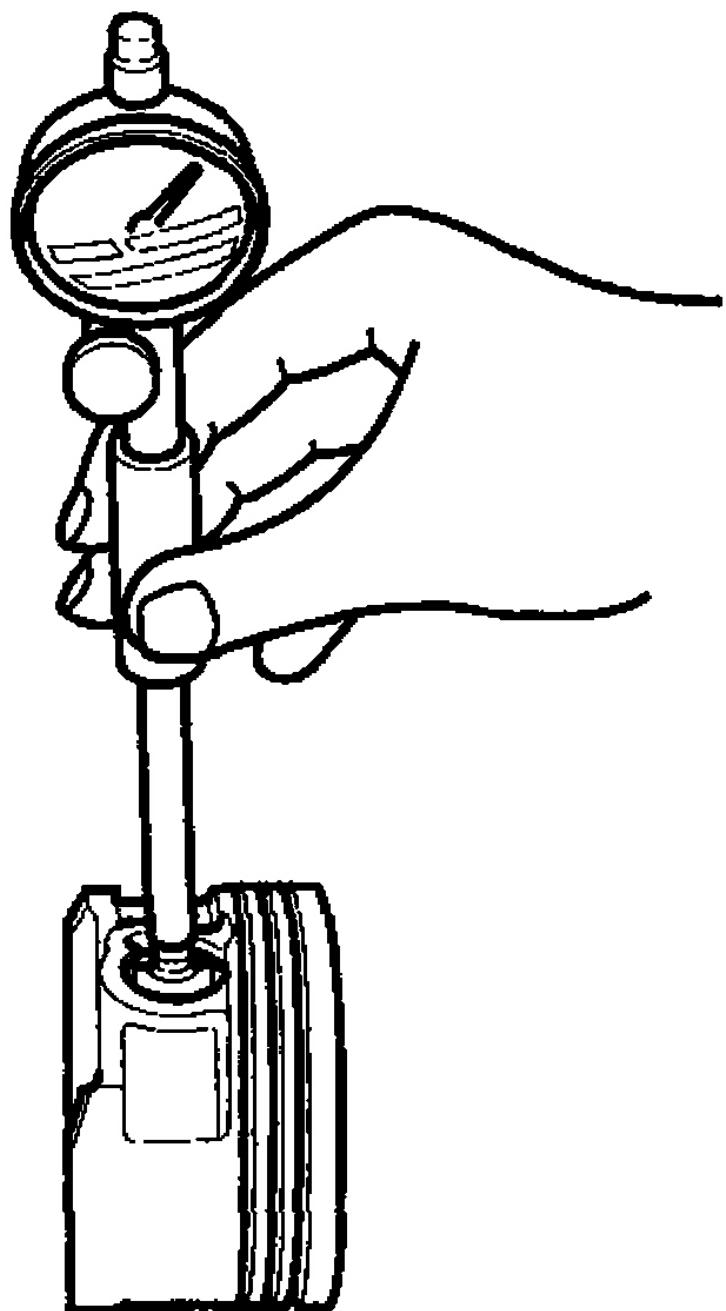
Identifying Zero Dial Indicator To Piston Pin Diameter
